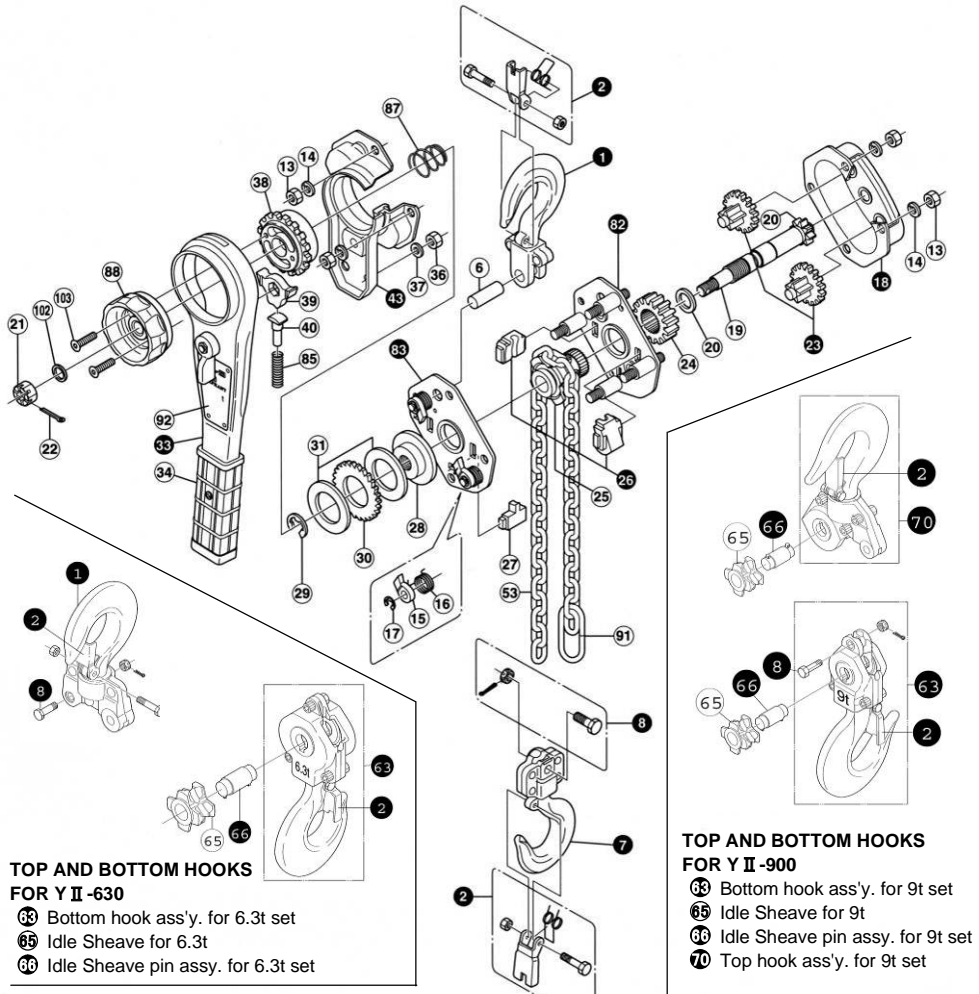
DETAIL DRAWING : YA-80.100.160.320.630.900TOP AND BOTTOM HOOKS
